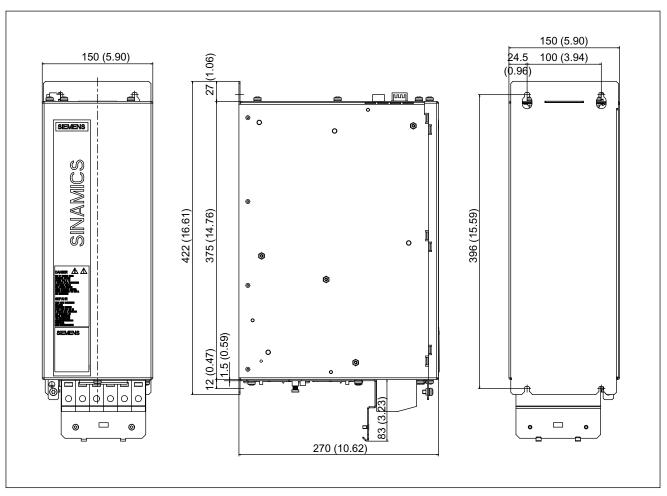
Dimension drawing of Active Interface Module 36 kW, all dimensions in mm and (inches)
